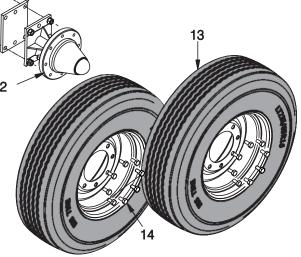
Mounting Tandem Wheel Plate, Hubs and Tires
